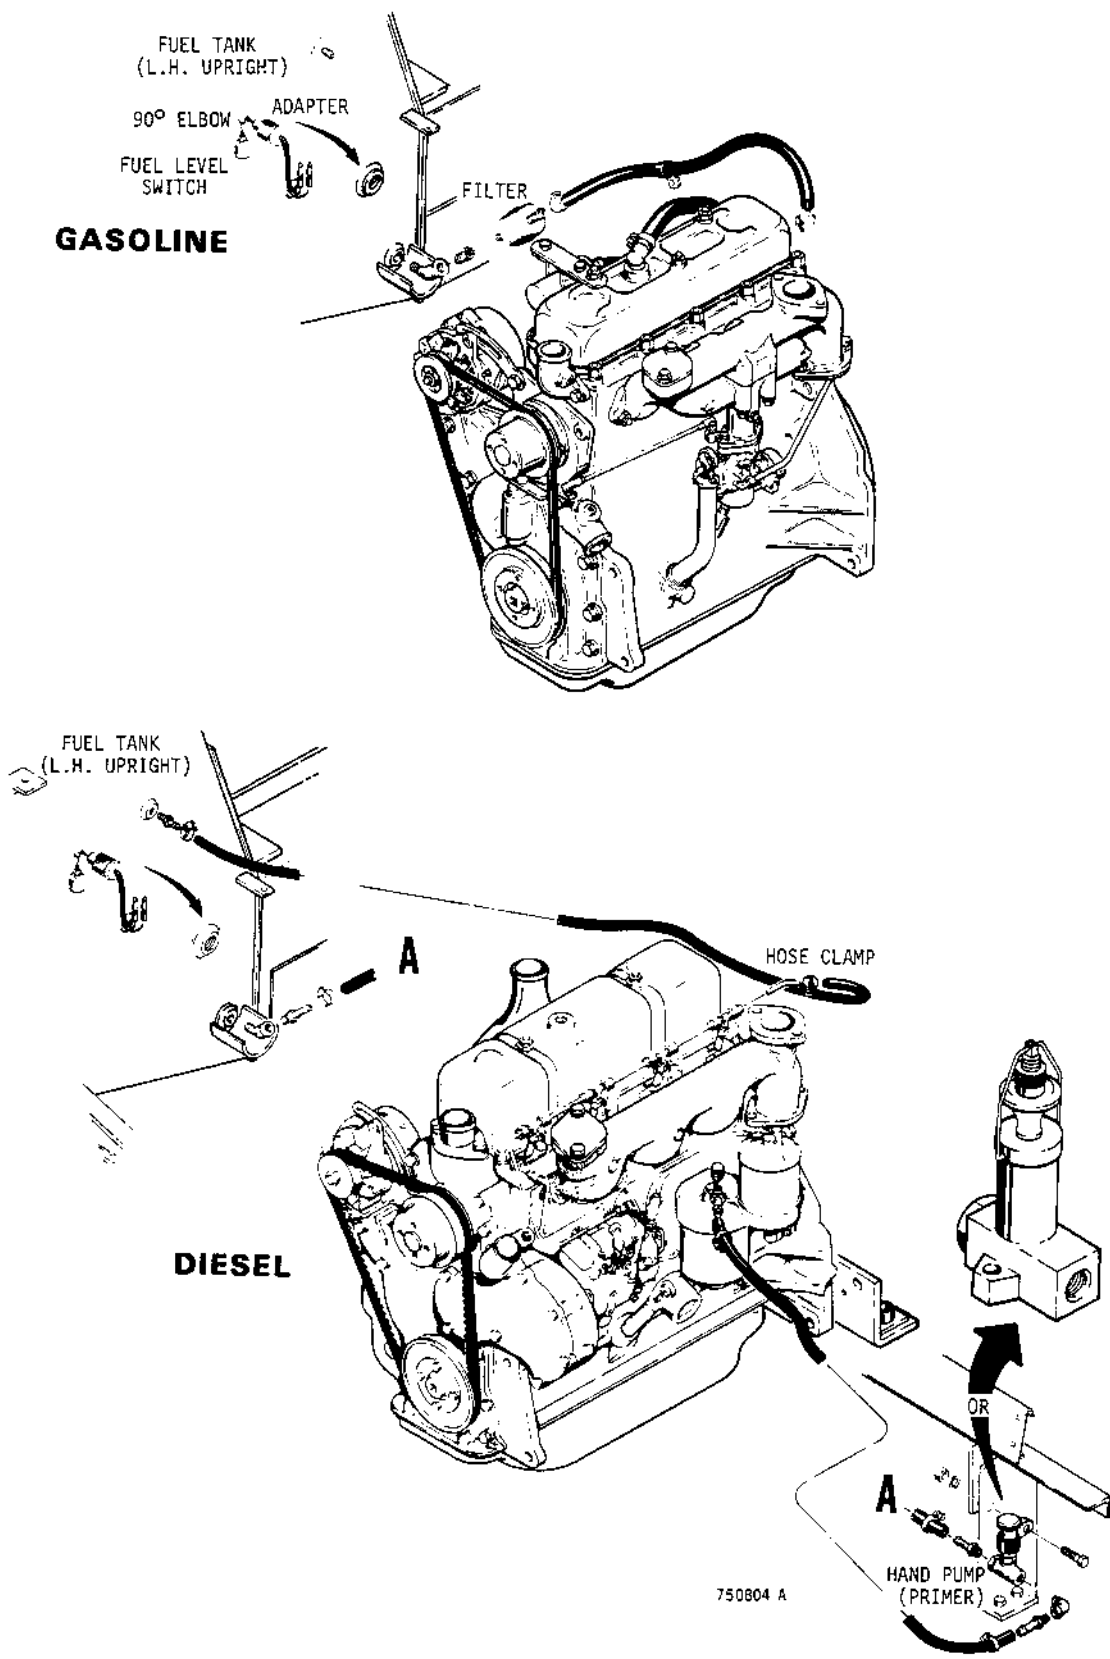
Fuel Tank and Fuel Lines, Gas and Diesel Engines
